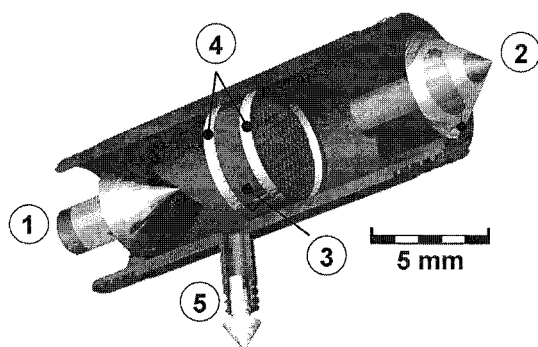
Schematic design of a automatic hydrogel based valve; 1– inlet, 2 – outlet, 3 – actuator chamber filled with hydrogel particles, 4 – steel mesh, 5 – bypass.
